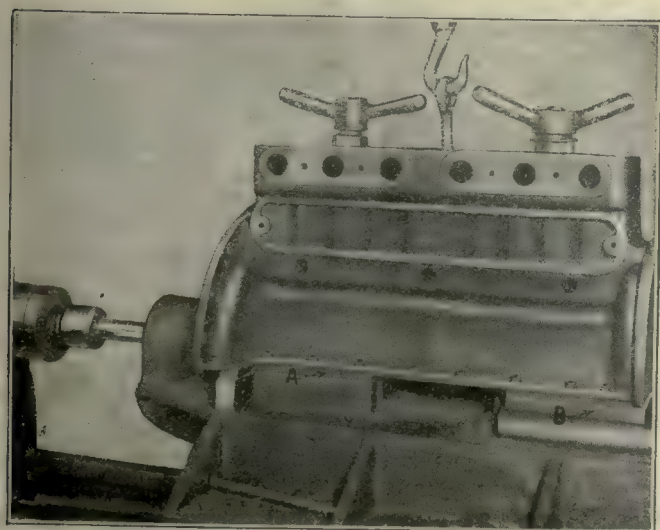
BORING THE MAIN BEARINGS FOR BABBITTING
